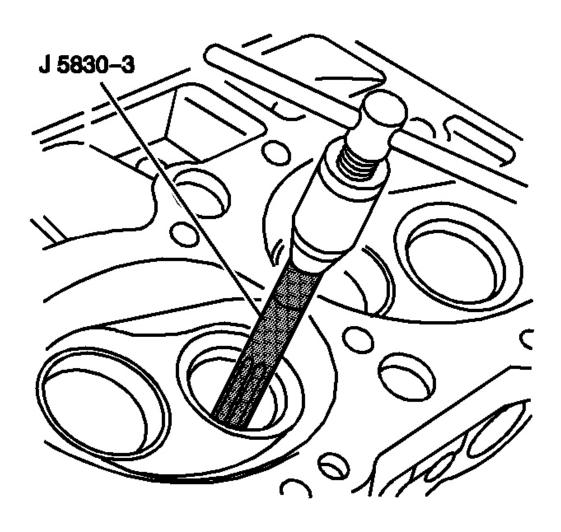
Reaming Exhaust Valve Guide Using J 5830-3 Courtesy of GENERAL MOTORS CORP.
